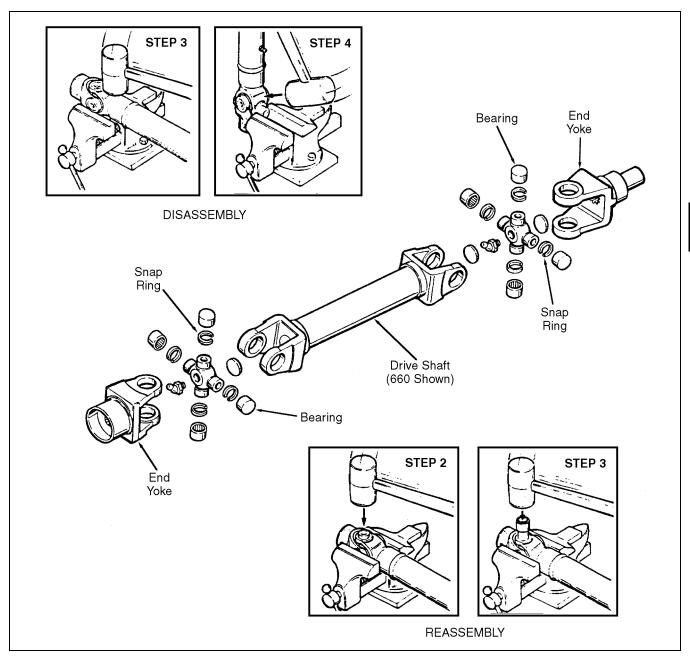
C-3. Drive Shaft Disassembly and Reassembly
